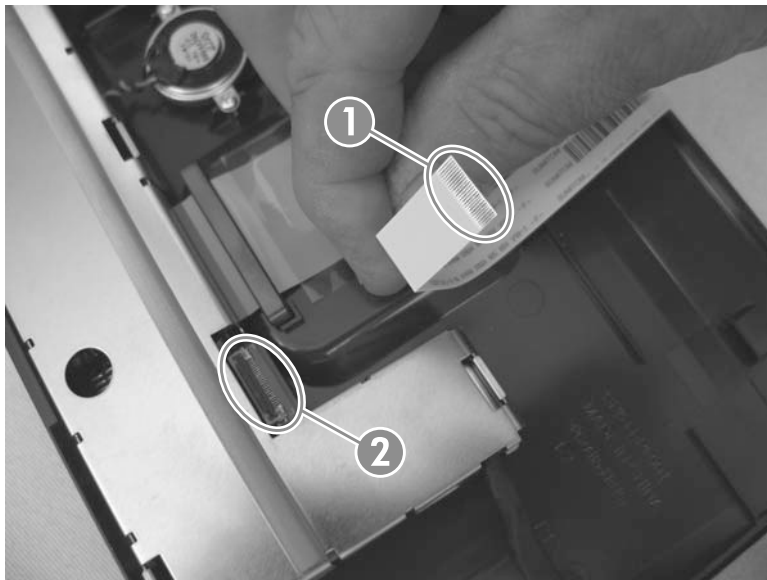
Remove the control-panel assembly to keyboard FFC (3 of 3)
